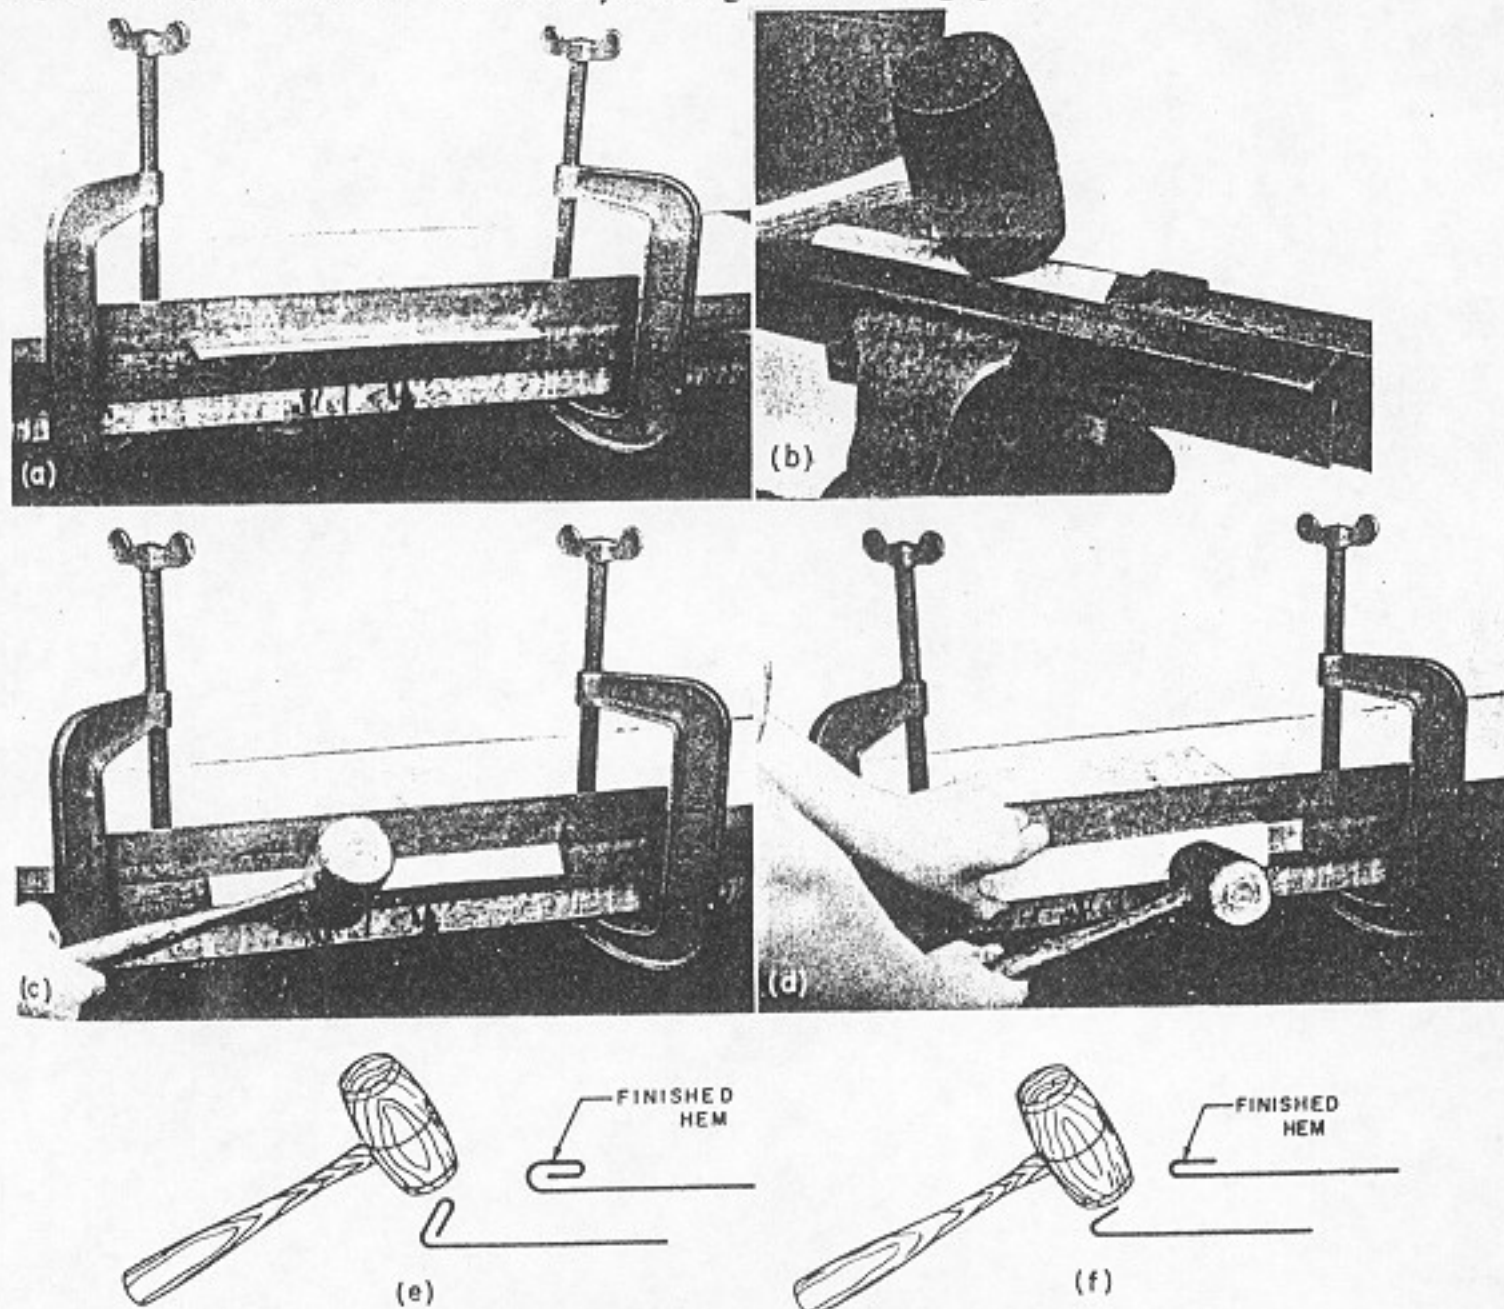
Do not flatten the top edge of the hem with the mallet; it should be left round. This gives the edge additional stiffness.
